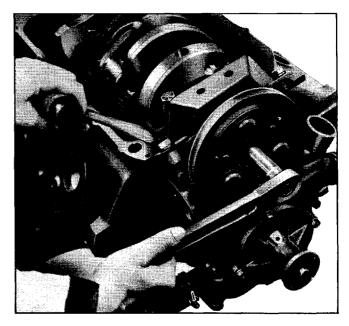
Holding Crankshaft to Remove Harmonic Balancer
